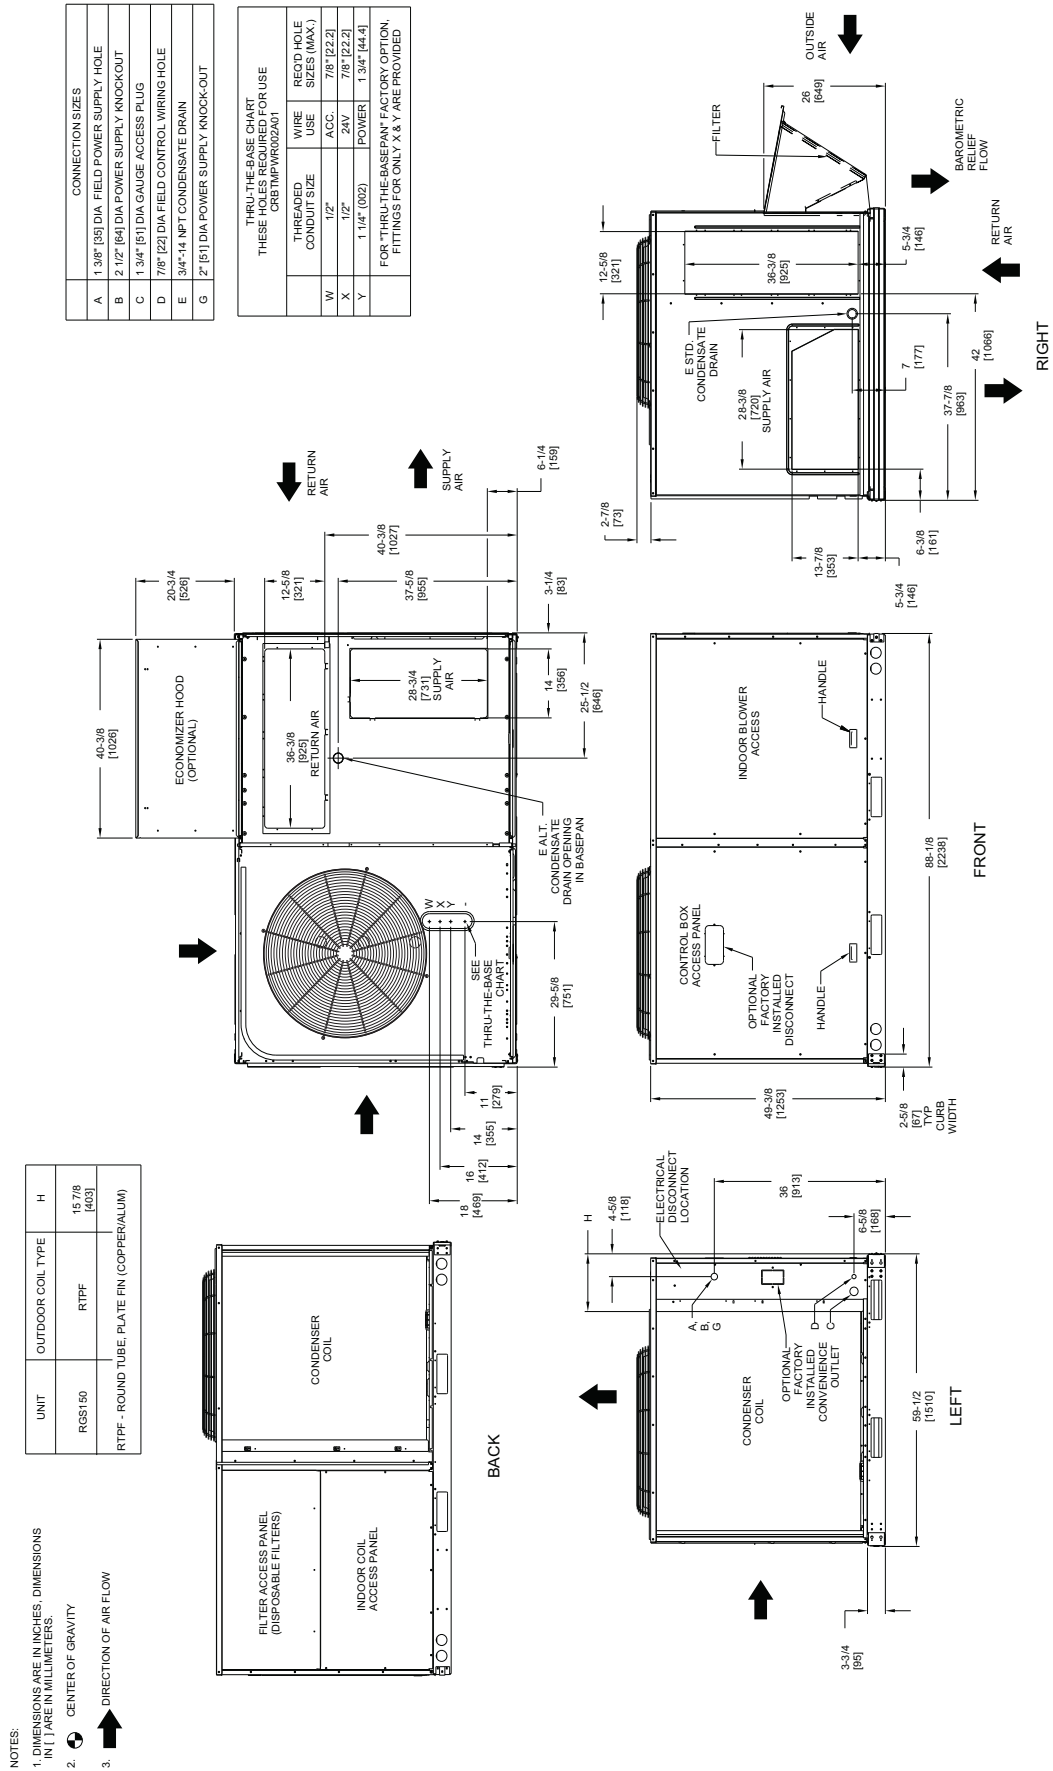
Dimensions RAS150 (Sheet 1 of 2)
